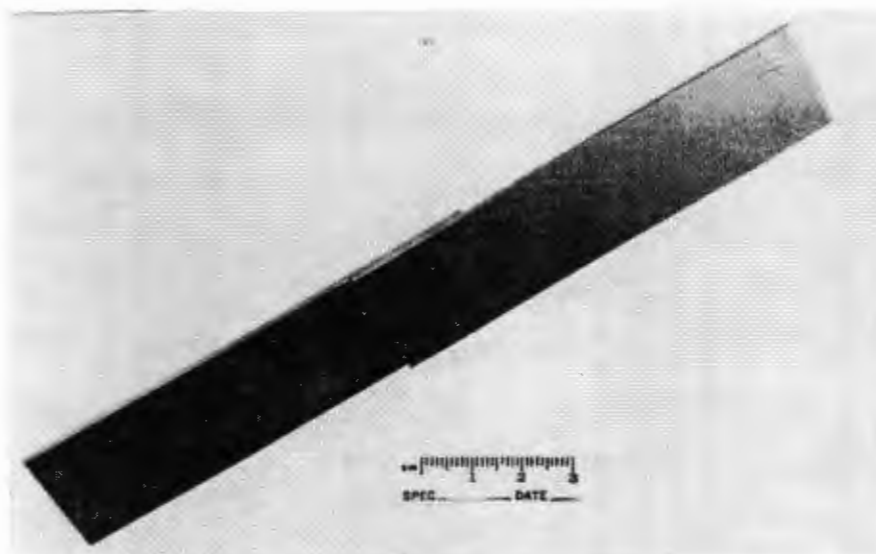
Representative seam weld specimen in the as-received condition; reduced 25%.
